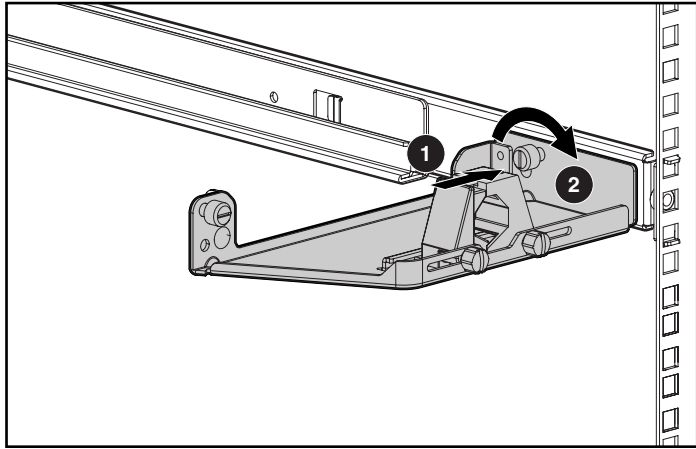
Inserting and attaching the fixed cable tray (rear view)
